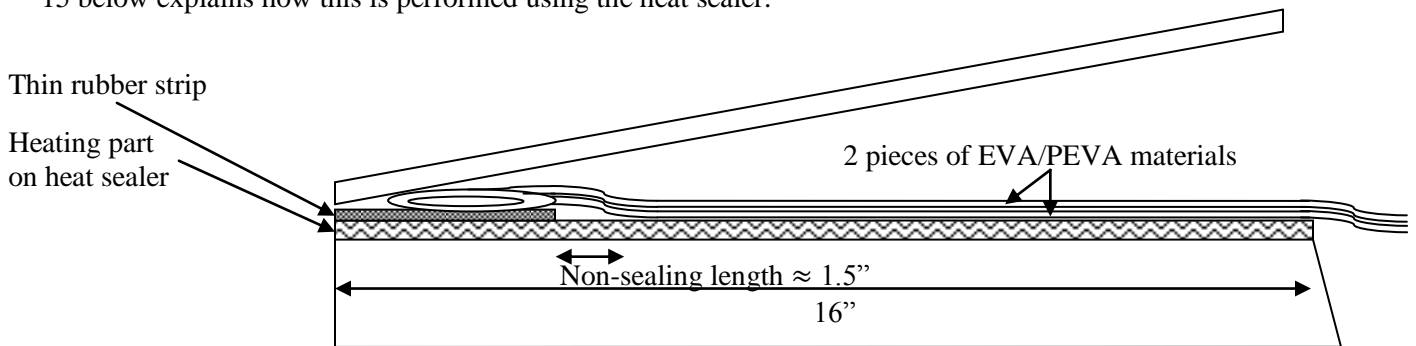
Using the heat sealer to seal 2 pieces of EVA or PEVA sheets with lengths of greater than 16"
